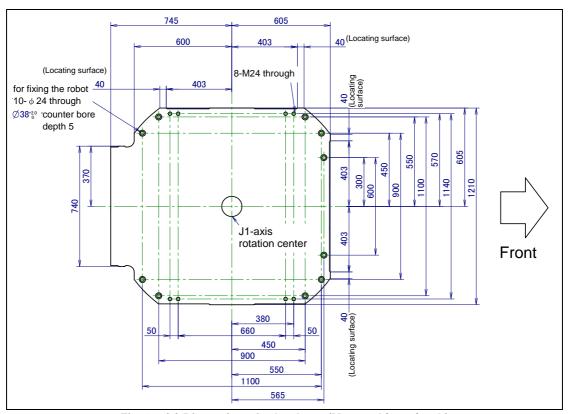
(a) Dimension of robot base (M-2000iA/1200/900L)
